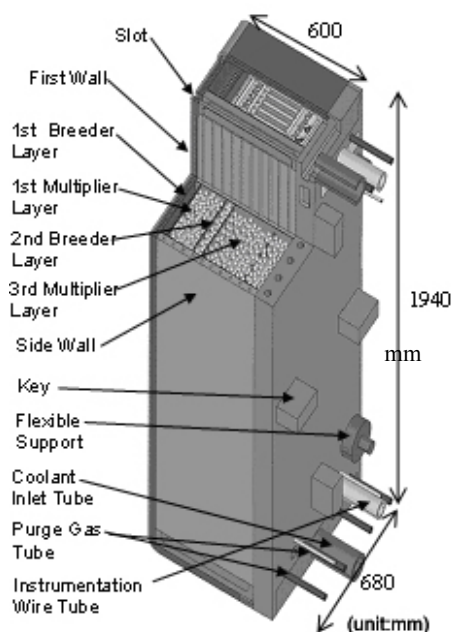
Three dimensional view of the structure of the WCSB TBM. [4.4-2]
